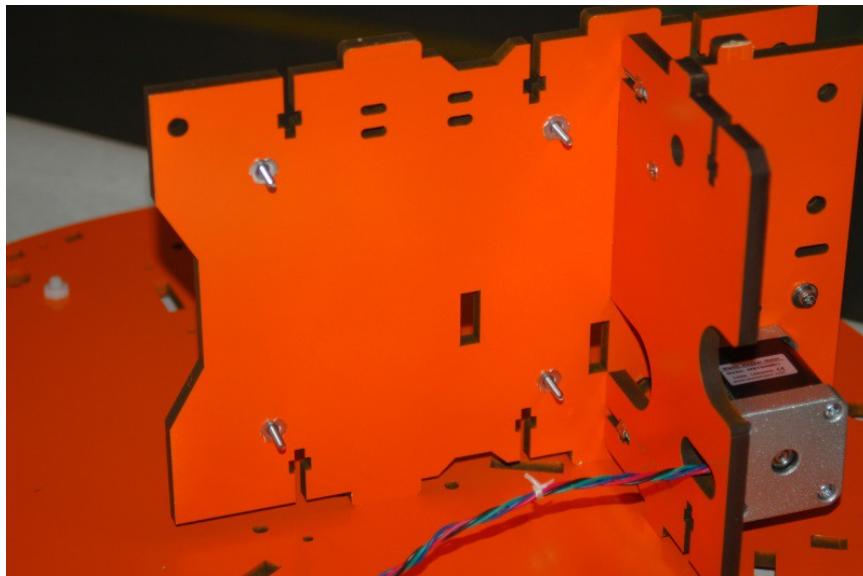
T-Nuts installed on the back of the X-Axis Tri-Support
